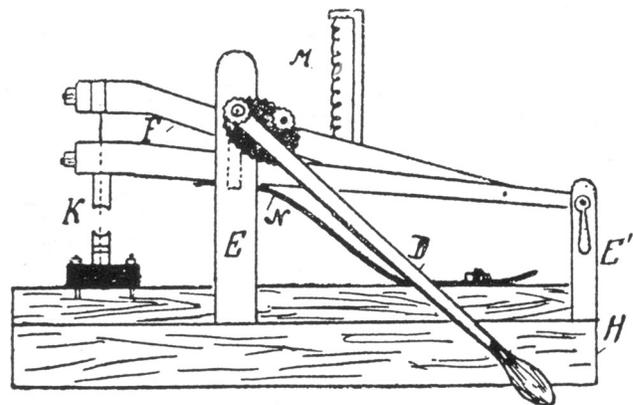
“Körnel pressing machine” (*Körneldruckmaschine*) (Parkert 1925:186).
